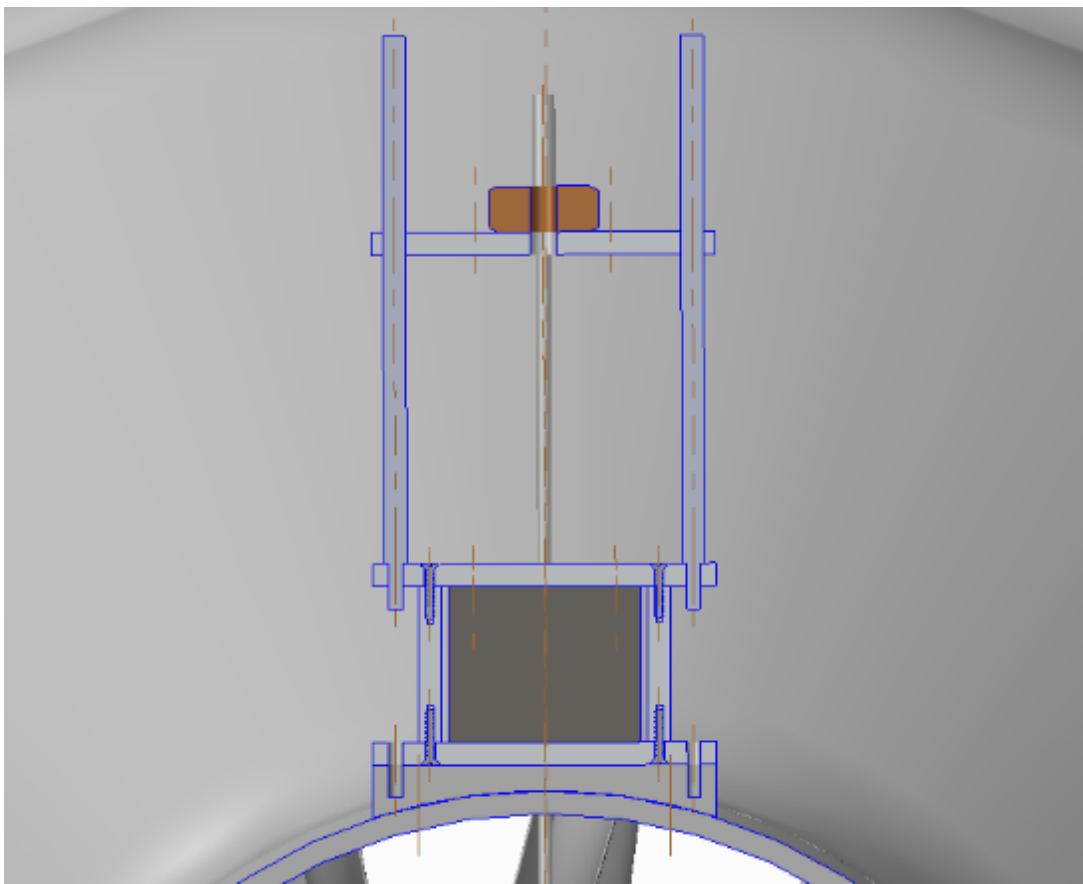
The radial traverse used to move a 5-hole probe radially for initial testing
